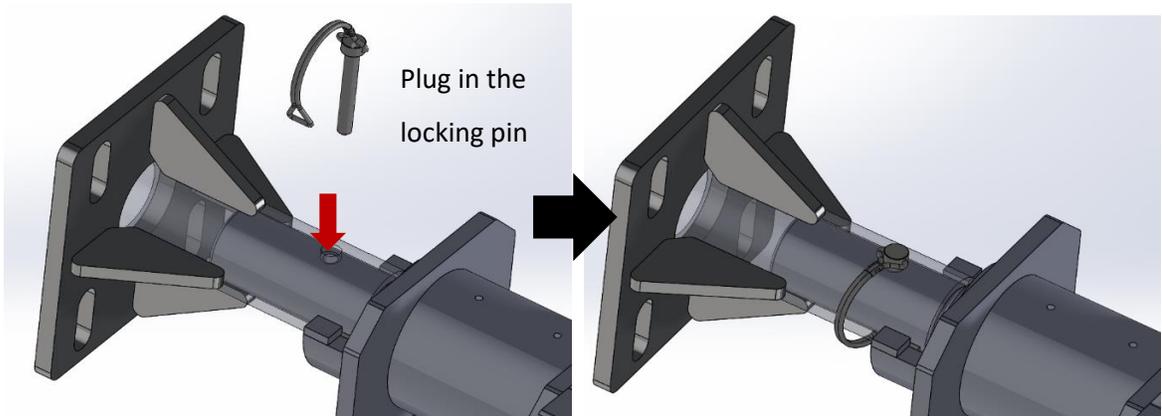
Operating Procedure for Welding Fixture Changeover, Plug in Locking Pin, Idle Ends
